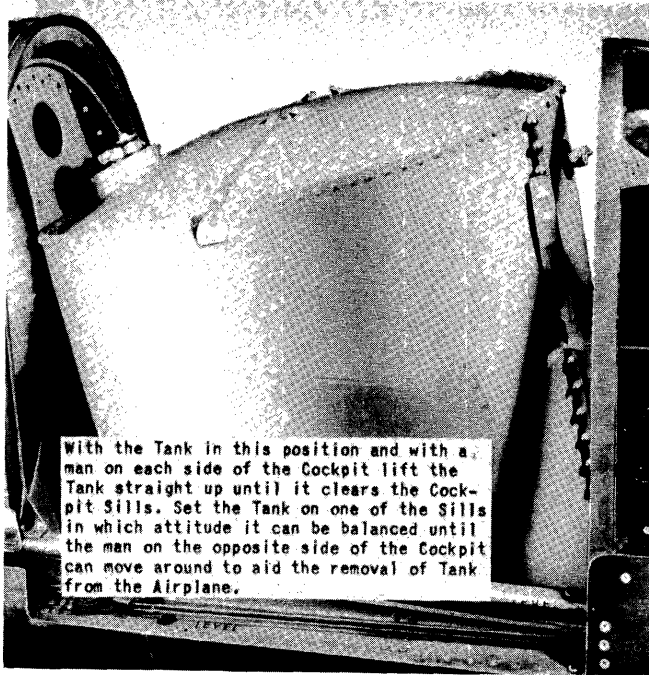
Fuselage Tank Ready for Removal from the Cockpit
